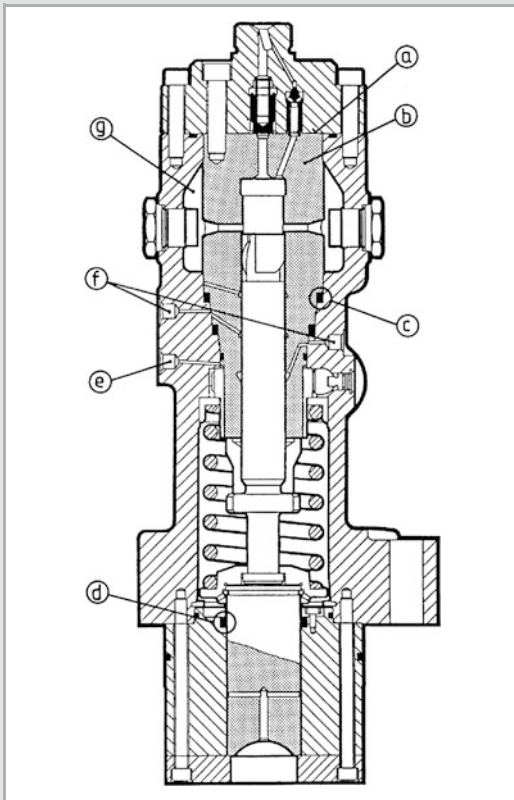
Heavy fuel oil injection pump with fuel rack lubrication and leak fuel removal; blind hole element for high injection pressure (L'Orange). (a) Only a high pressure sealing face; (b) rigid monoelement for high pressures in heavy fuel oil operation; (c) special sealing elements for all types of heavy fuel oil; (d) central tappet with a hydraulic seal to protect the engine lubricating oil against fuel contamination; (e) scavenging connection for the governed range; (f) dual drainage for good sealing against heavy fuel oil; (g) large suction chamber – low pressure amplitudes to protect heavy fuel oil equipment on the low pressure side
